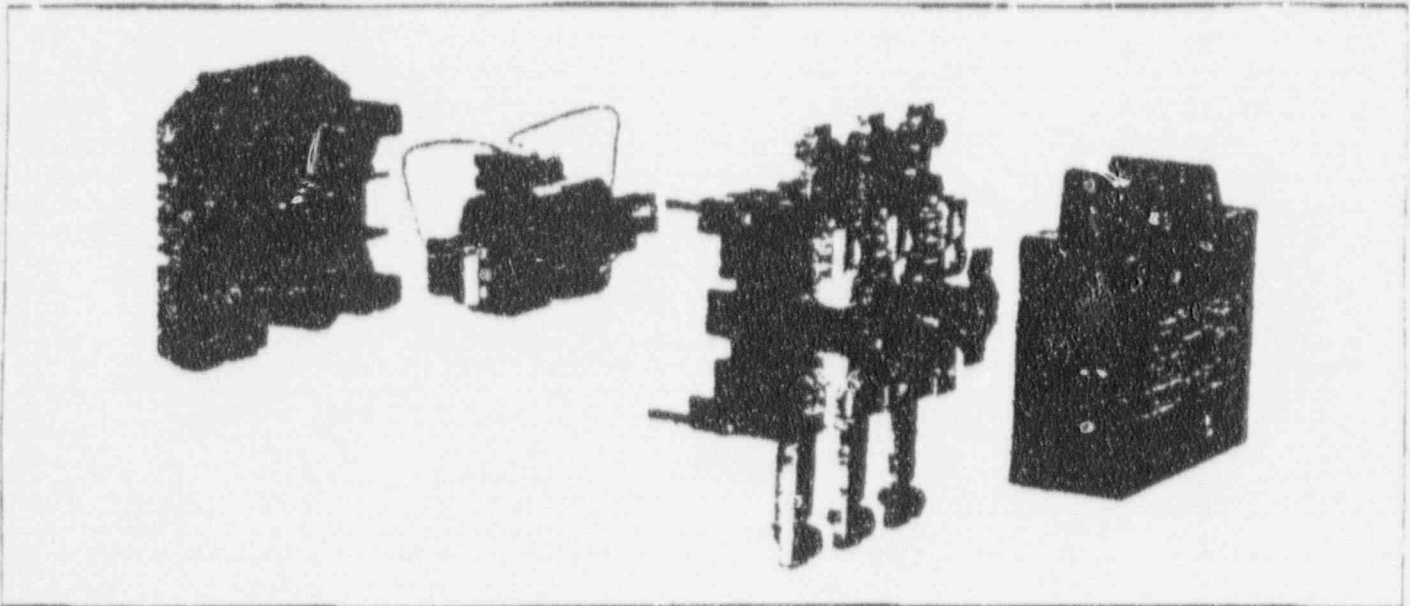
250 Ampere DPCK Magnetic Contactor (Exploded View)
